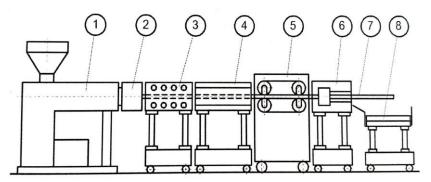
Schematic of a technological line for pipe extrusion; 1 - extruder, 2 - die, 3 - calibrating device, 4 - cooling device, 5 - receiving device, 6 - cutting device, 7 - extruded product, 8 - stacking device [3].
